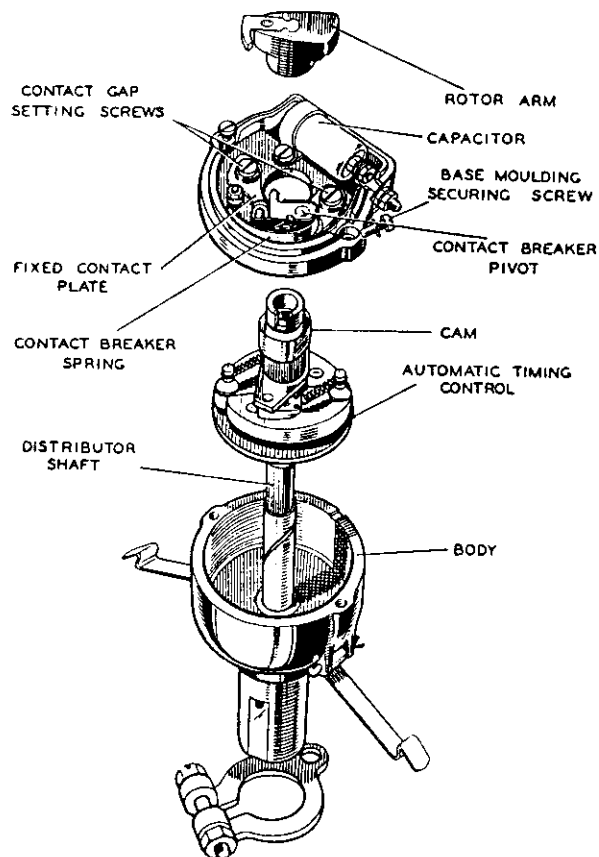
DISTRIBUTOR, TYPE DKX2A.
